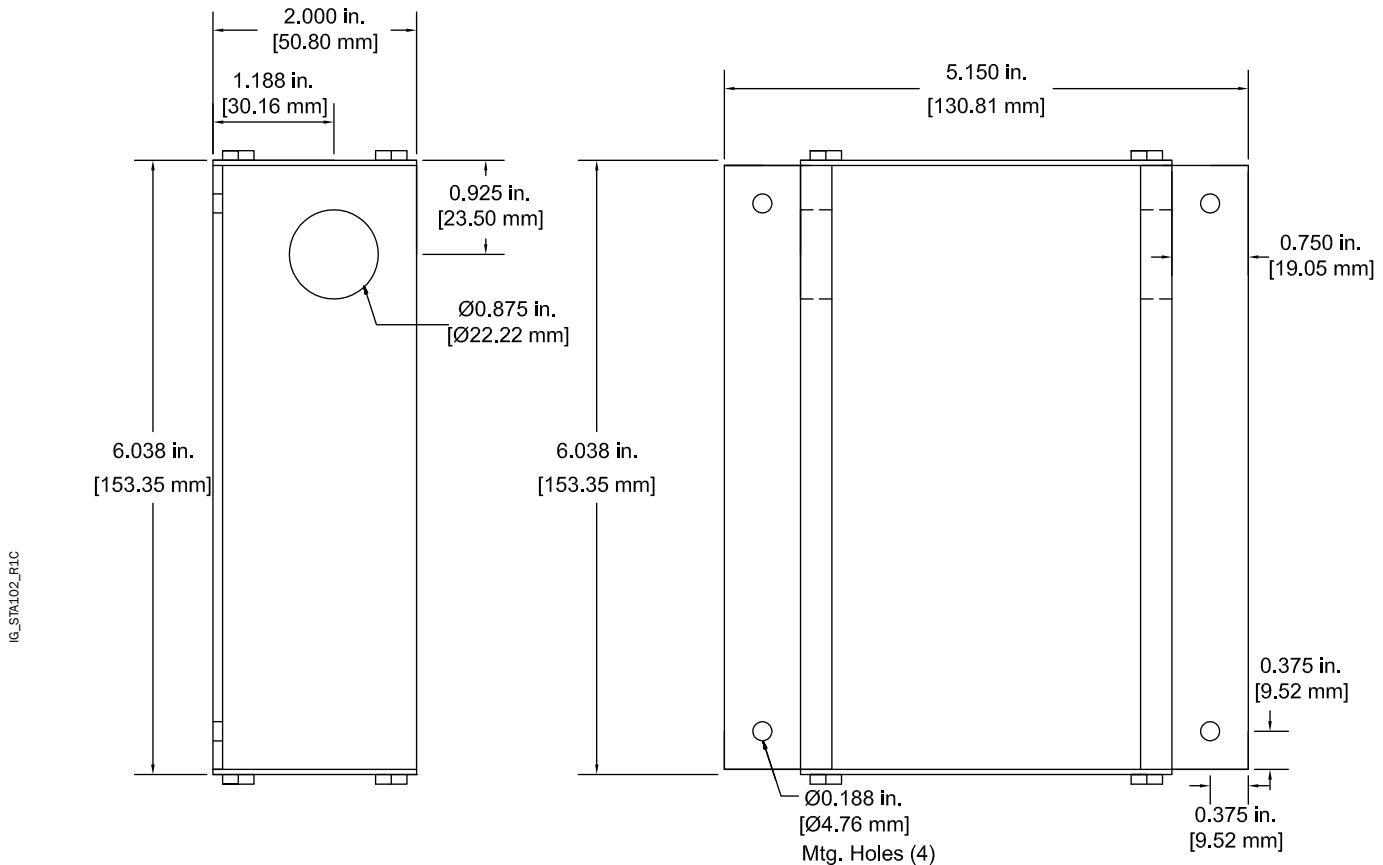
STA102 Transmitter Mechanical Detail Drawing
